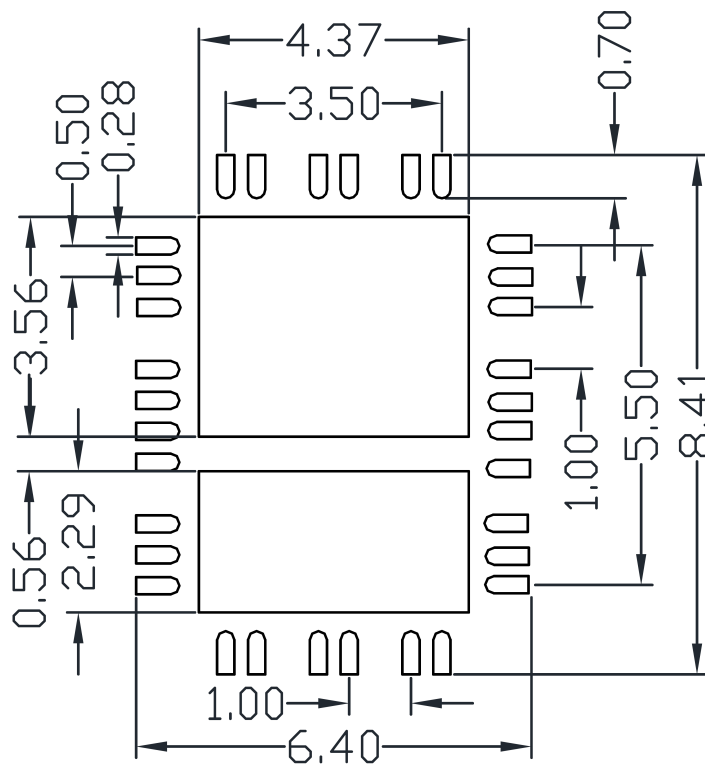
• PD70224 Top layer Solder Mask, Solder Paste and Vias Recommended PCB Layout (mm)
